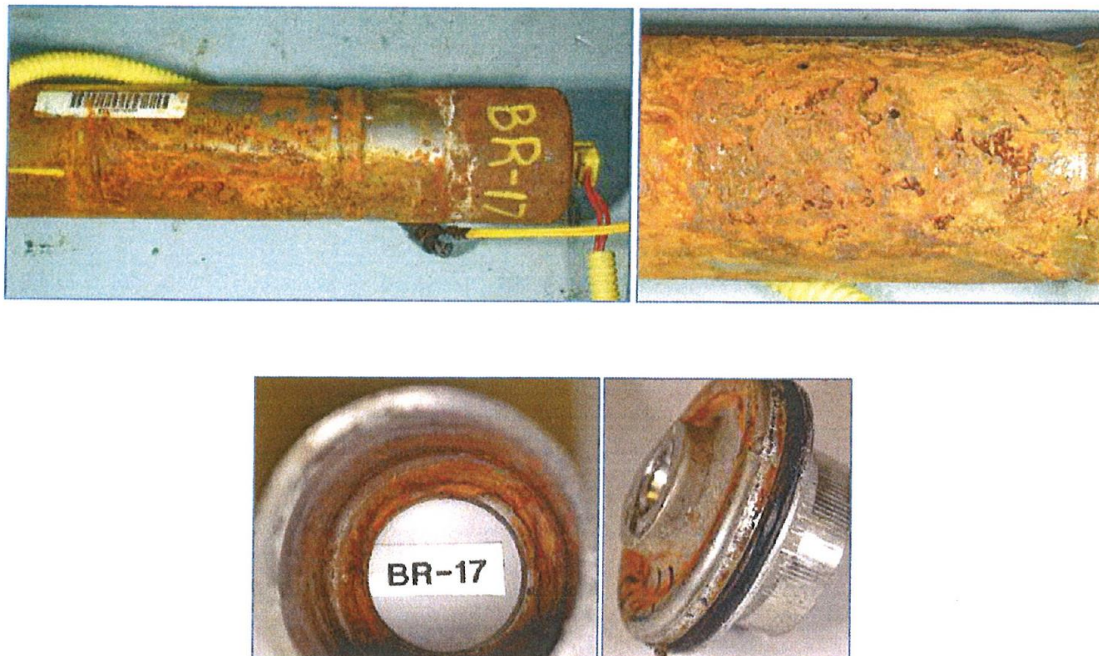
PSPI-L Disassembly showing Moisture Intrusion through the End Crimp
